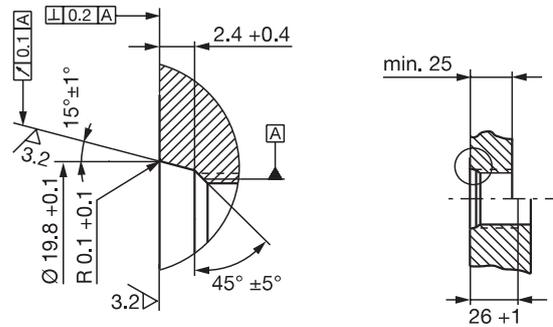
Mounting hole M18x1.5 per ISO 6149 O-ring 15.4x2.1
